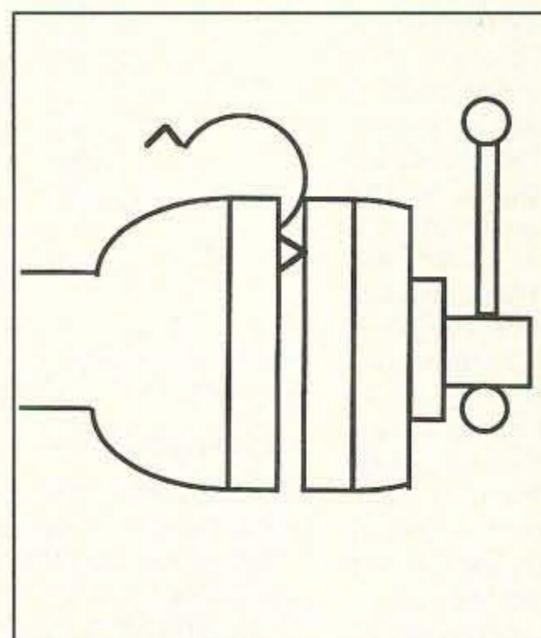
Using a vise to flatten the edges of a flagpole bracket to make the end half-ring a little larger so that the spring will fit in.
